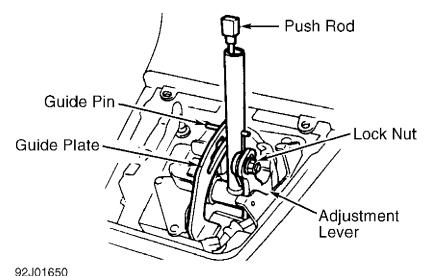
Gearshift Lever Components ID Courtesy of Mazda Motors Corp.
